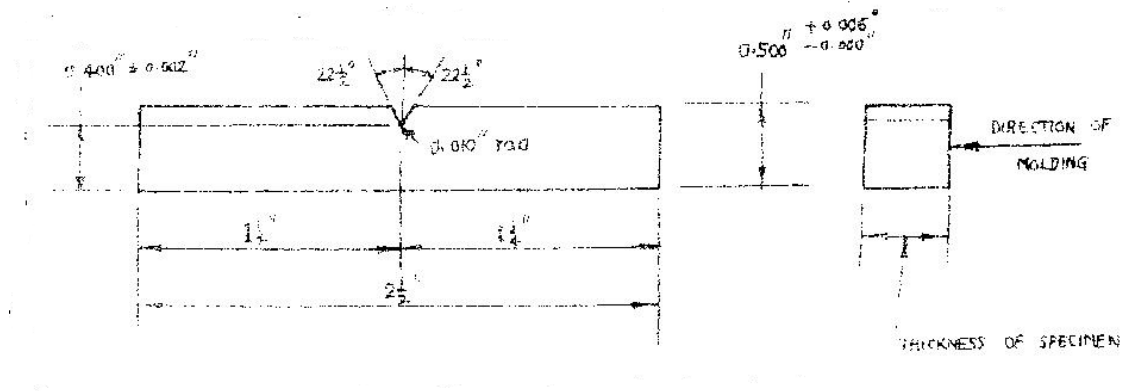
Izod (cantilever beam) impact specimen for sheet plastic material
